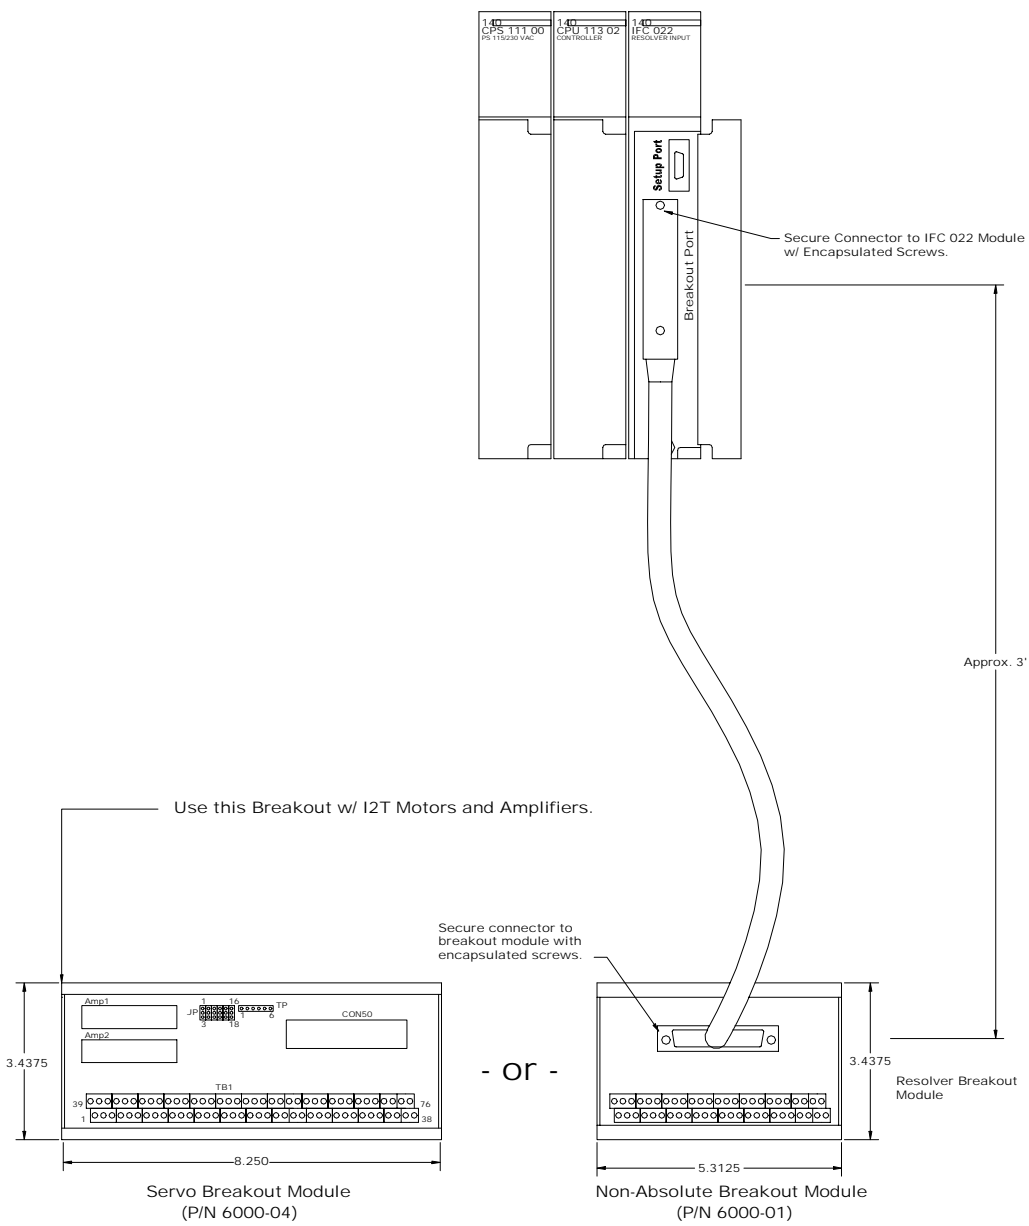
Panel Mounting of the Cable and Breakout Modules
